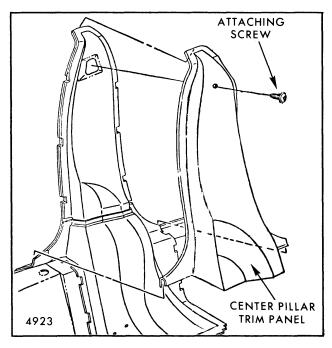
Center Pillar Trim Attachment Hardtop Styles
